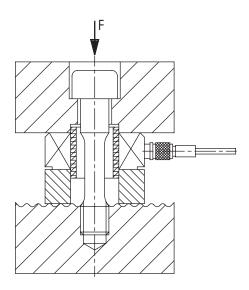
Mounting with use of a force distributing ring Type 9505 ... 9575 (see data sheet mounting accessories for load washers Type 9505_000-193)
